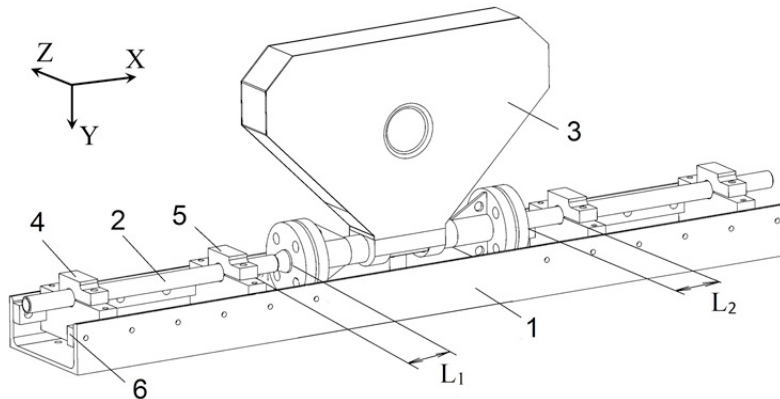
Scheme of equipment for fixing the meter: 1 - basis; 2 - pipe; 3 - flowmeter; 4 - fixed clamp; 5 - movable clamp; 6 – guide.
